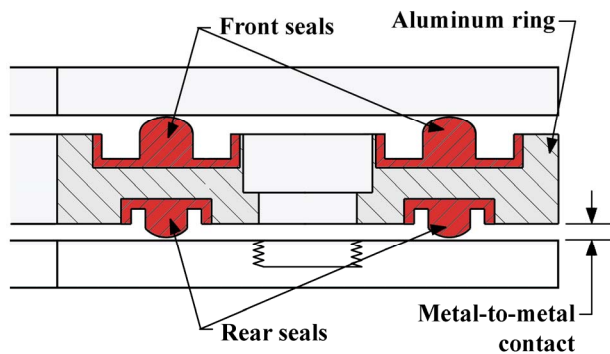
Illustration of the cross-section of a 12"EDU54 test specimen having two front-side and two rear-side elastomer seals in the aluminum ring.
